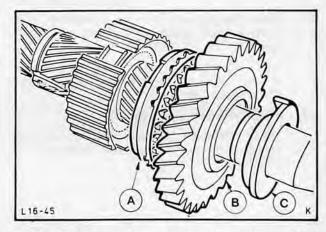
Slide 1st gear with synchroniser ring and oil scoop ring onto mainshaft
